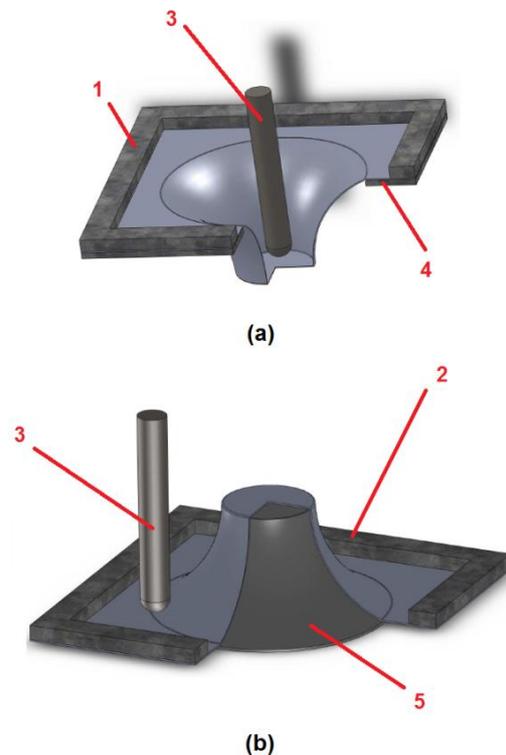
Illustration of (a) SPIF, (b) TPIF with 1: stationary blank holder, 2: moving blank holder, 3: forming tool, 4: backing- or faceplate, 5: stationary or moving, full or partial die
